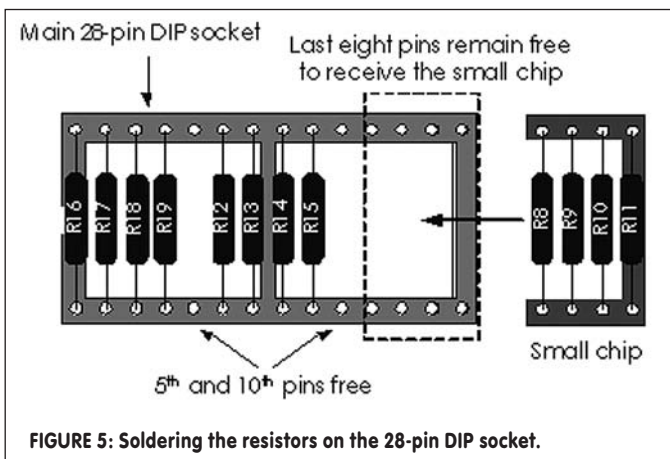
Soldering the resistors on the 28-pin DIP socket.
